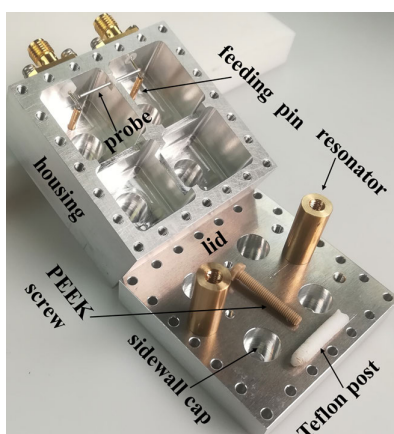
The fabricated folded four-pole inset filter (disassembled).
